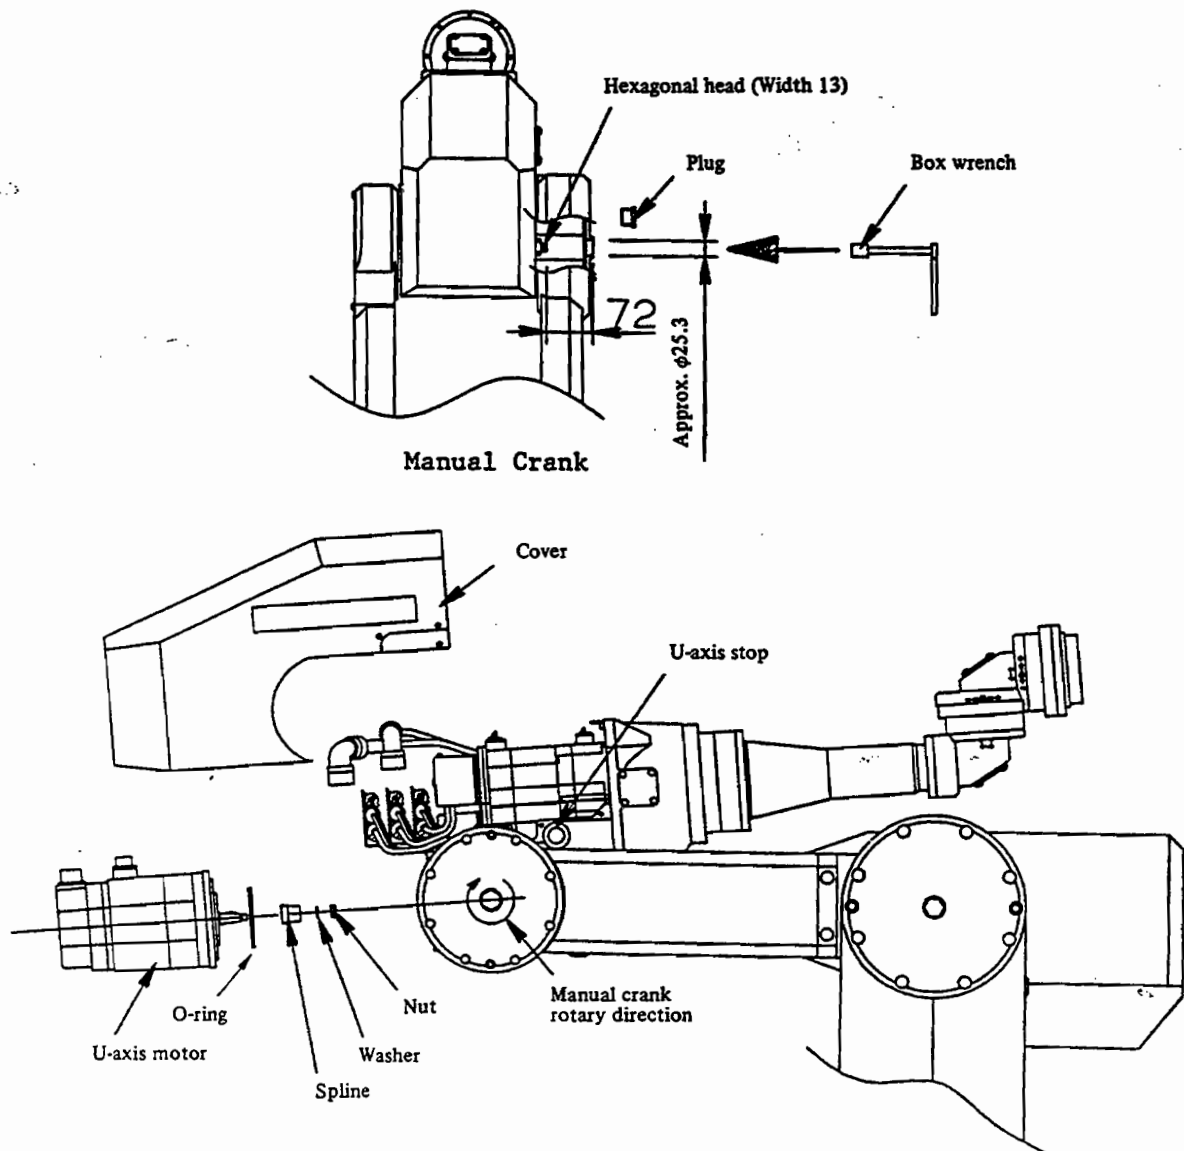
(a) Replacing U-axis motor (S-700)
